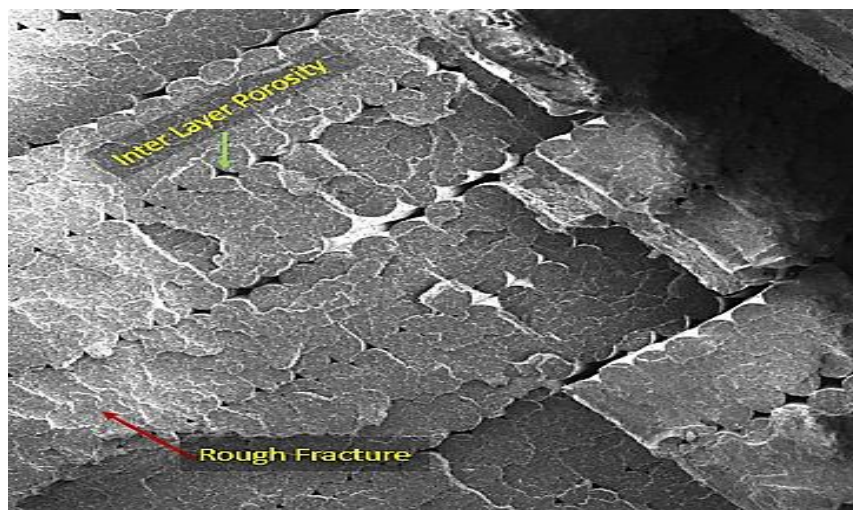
Fracture surface of PLA with raster angle 0
